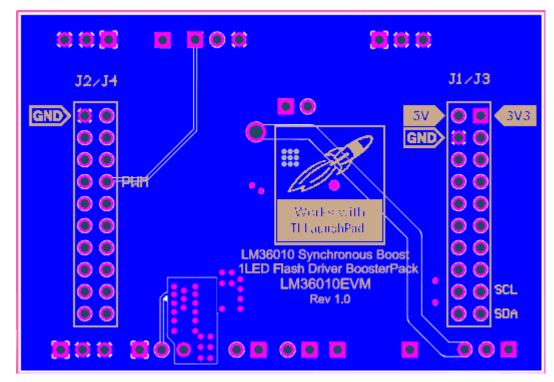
Bottom Assembly Layer (UNMIRRORED)
